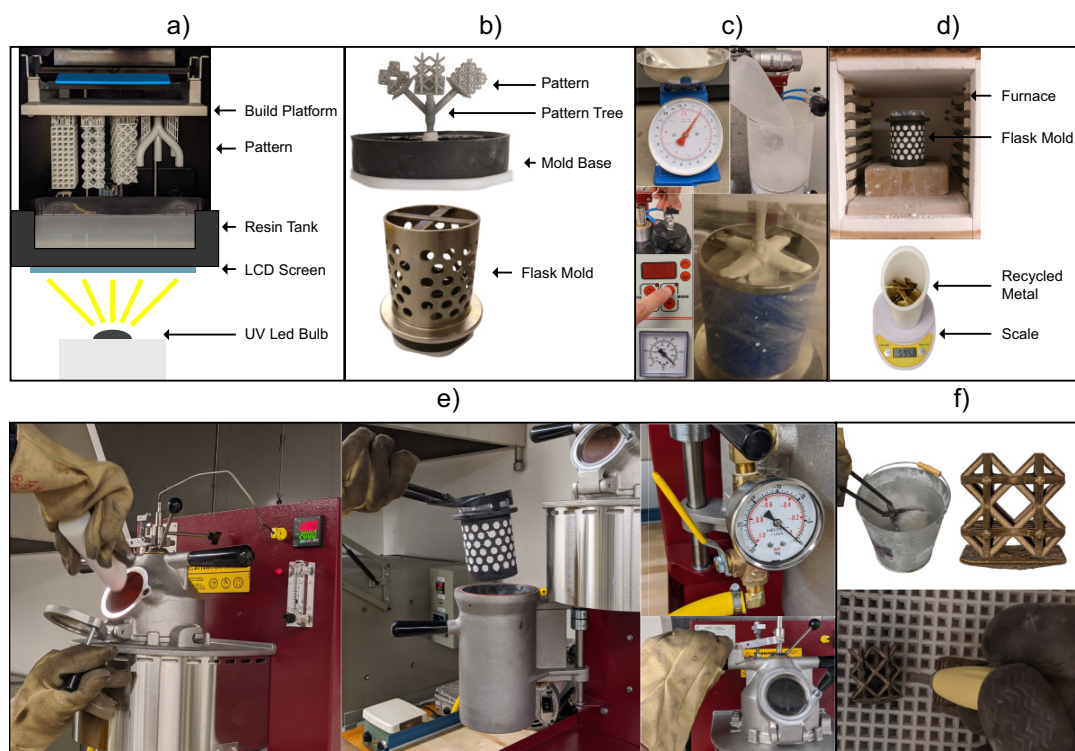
RIC process: a) DLP additive manufacturing. b) Pattern spruing. c) Plaster mold making. d) Pattern burnout. e) Vacuum casting. f) Post processing.
